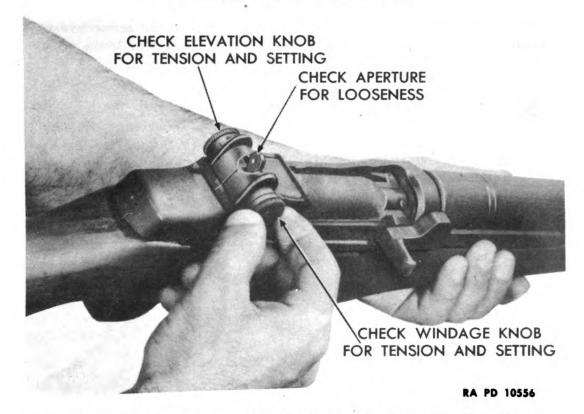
Checking the Rear Sight, Showing Points to be Inspected
